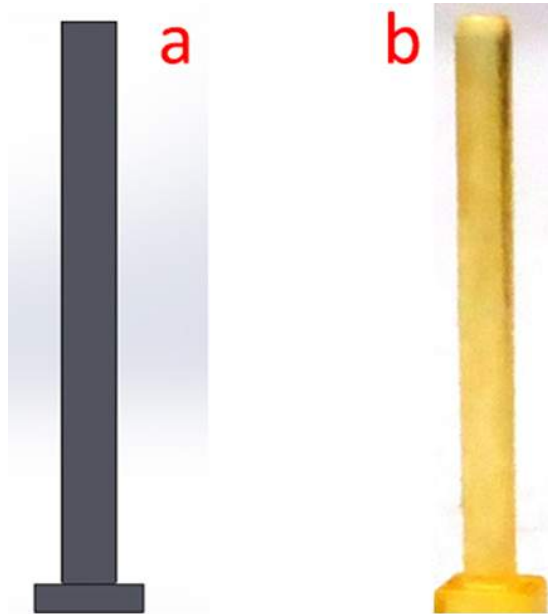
(a) Tower CAD design, (b) Fabricated tower
